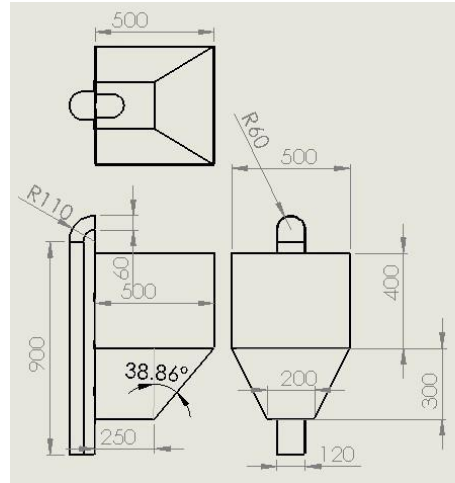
Isometric view seed hopper (all dimensions are in mm)
